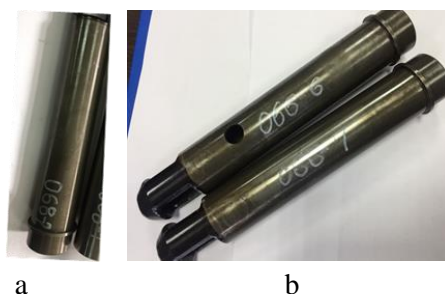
a.) piece of pipe b.) welded pulling pipe
